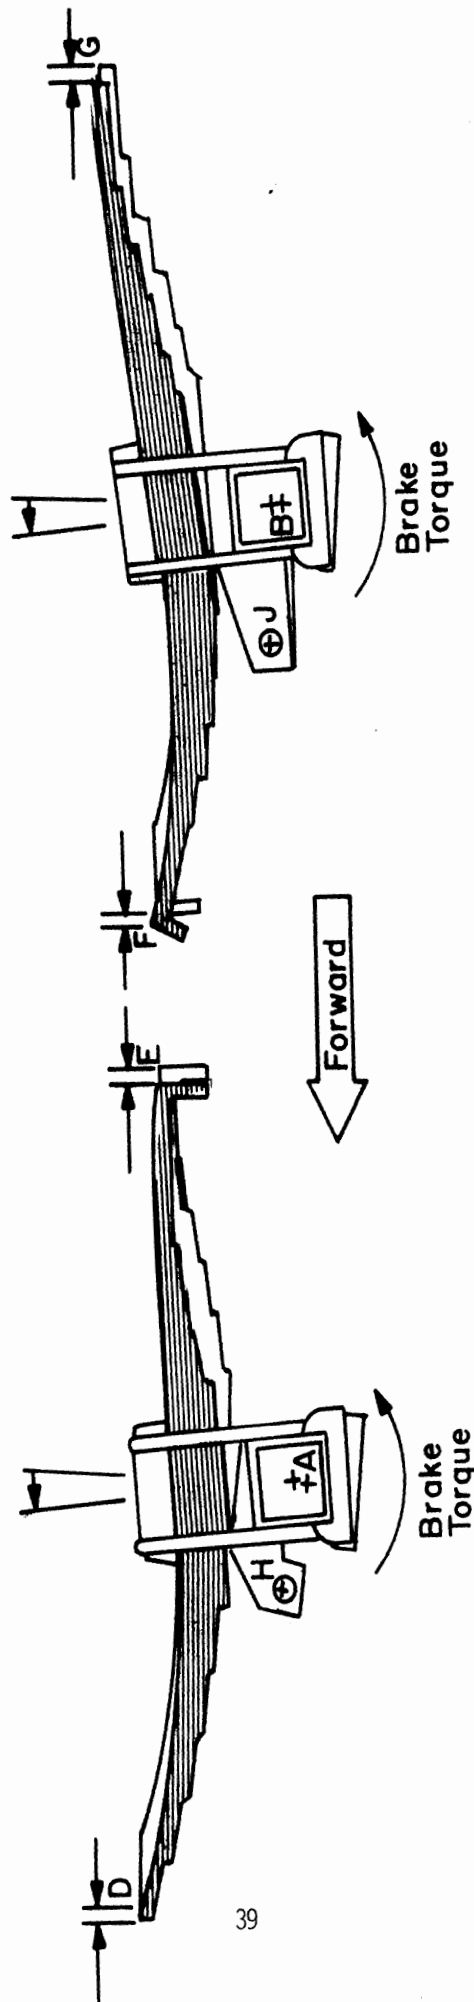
Spring contact points must slide forward for wrap-up to occur.
